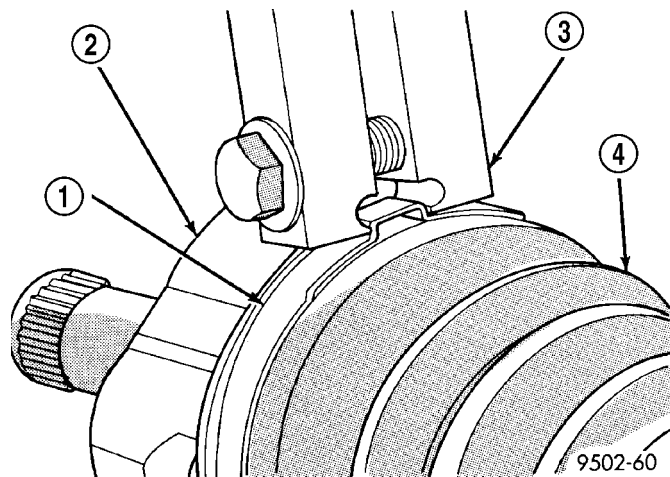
Crimping Tool Installed on Sealing Boot Clamp - Typical
